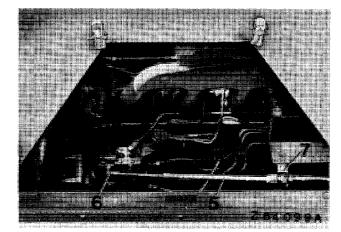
Preparing to Remove Engine at Roosa-Master Fuel Injection Pump
